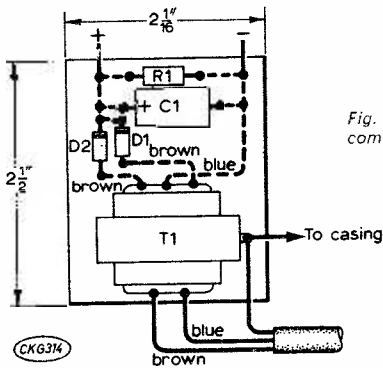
The wiring of the components on the drilled s.r.b.p. board.
